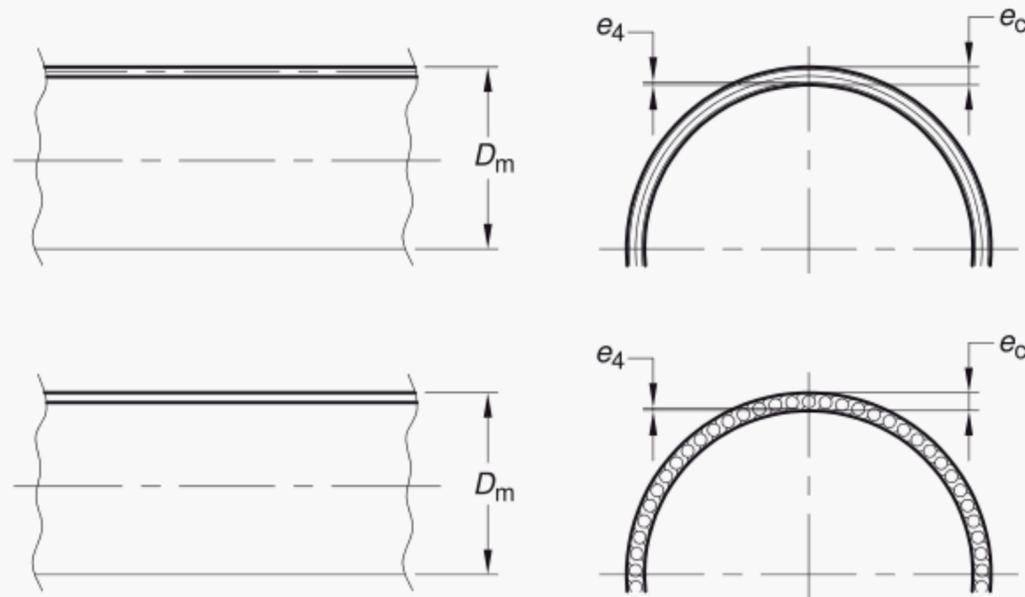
TYPICAL EXAMPLES OF WALL CONSTRUCTIONS—TYPE A1 PIPE
